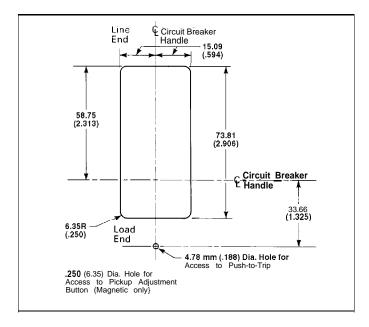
Circuit Breaker Escutcheon Dimensions
